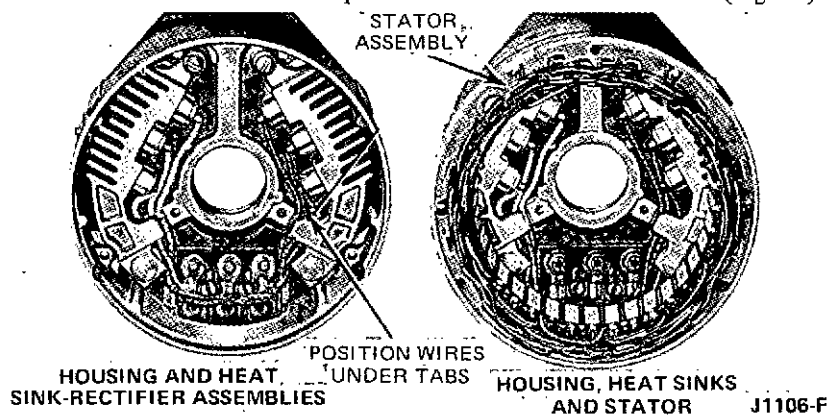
Rear Housing, Rectifier and Stator Assembly
